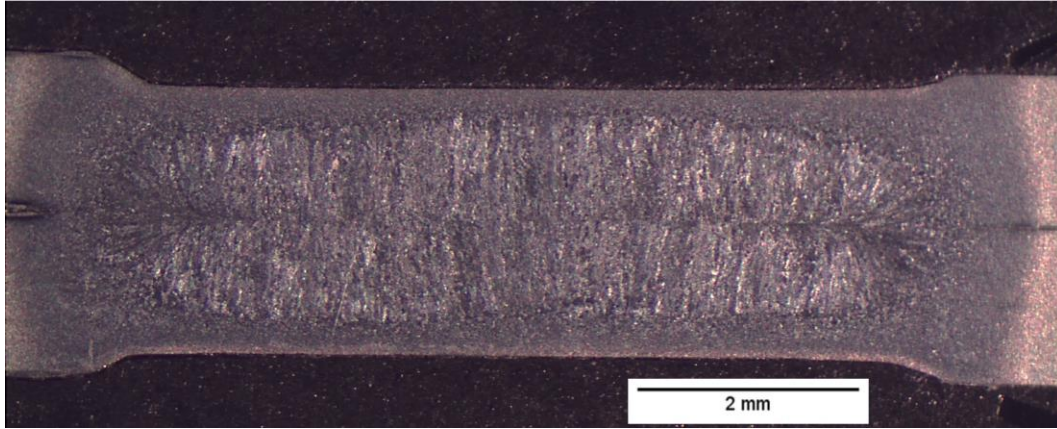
Zinc coated TRIP 1100 sample welded with aluminum interlayer, free of LME cracks
